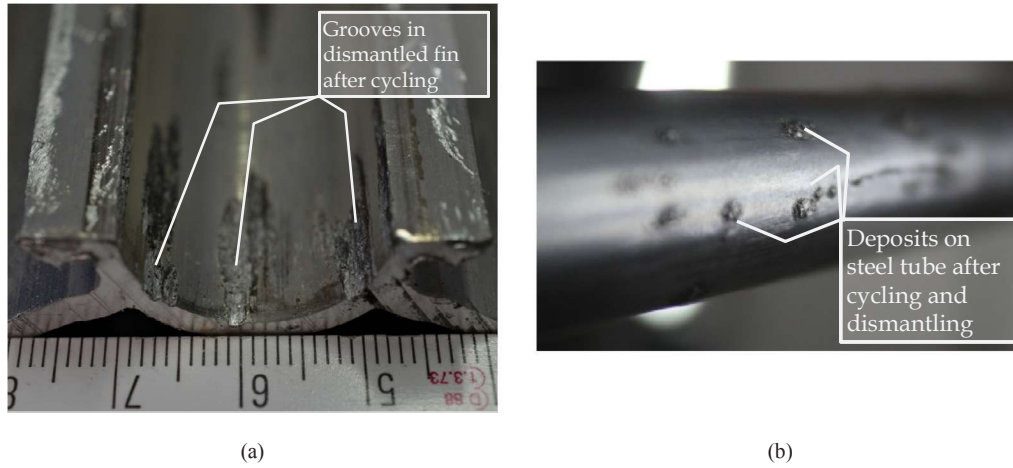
Movement measurement testing: Material exchange and marking of fins after thermal cycling and dismantling of the fin-tube assembly in fins mounted with clipping to tube with (a) grooves in the fin on the mounting surface between fin and tube and (b) deposits on the steel tube.
